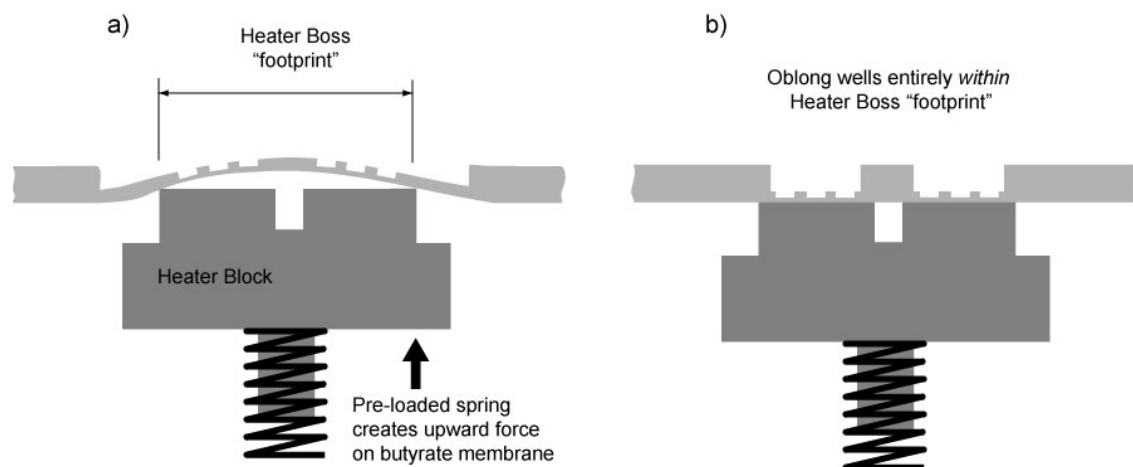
a) If the butyrate surface is milled too thinly *outside the heater boss footprint*, the heater block will deflect the membrane and create uneven surface contact. b) The double well design (with thin milling only completely *within the heater boss footprint*, even surface contact is maintained.
